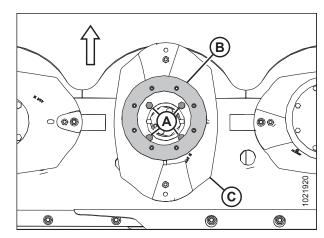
Inboard Right Drum with Cover Removed – View from Above
